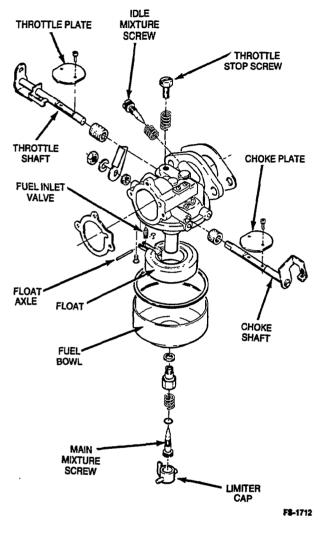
CARBURETOR DISASSEMBLY/OVERHAUL
